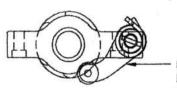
RIGHT SIDE VIEW 1 FRONT
